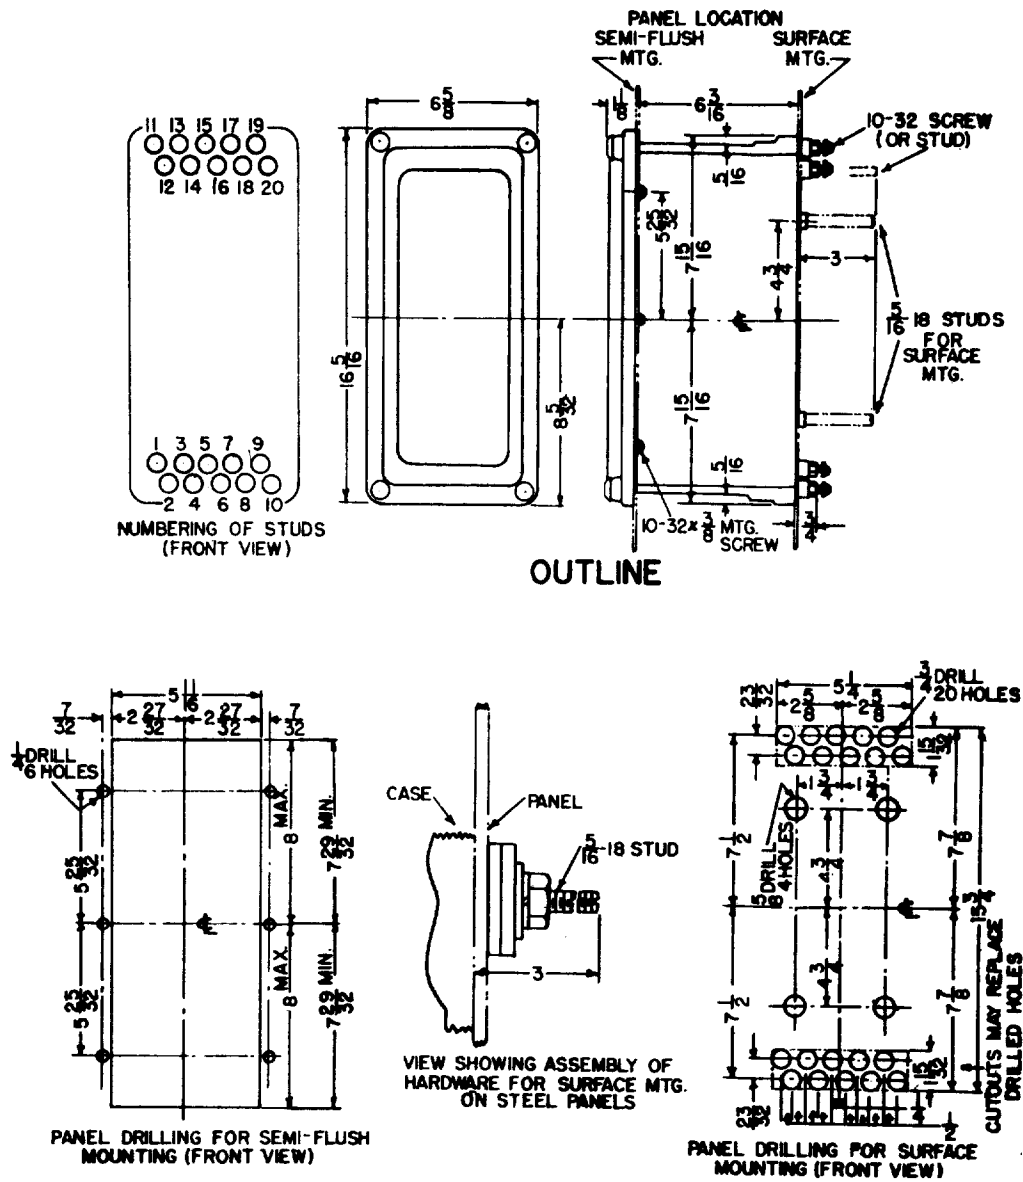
(K-6209274-2) Outline And Panel Drilling Dimensions For An M2 Size Case
